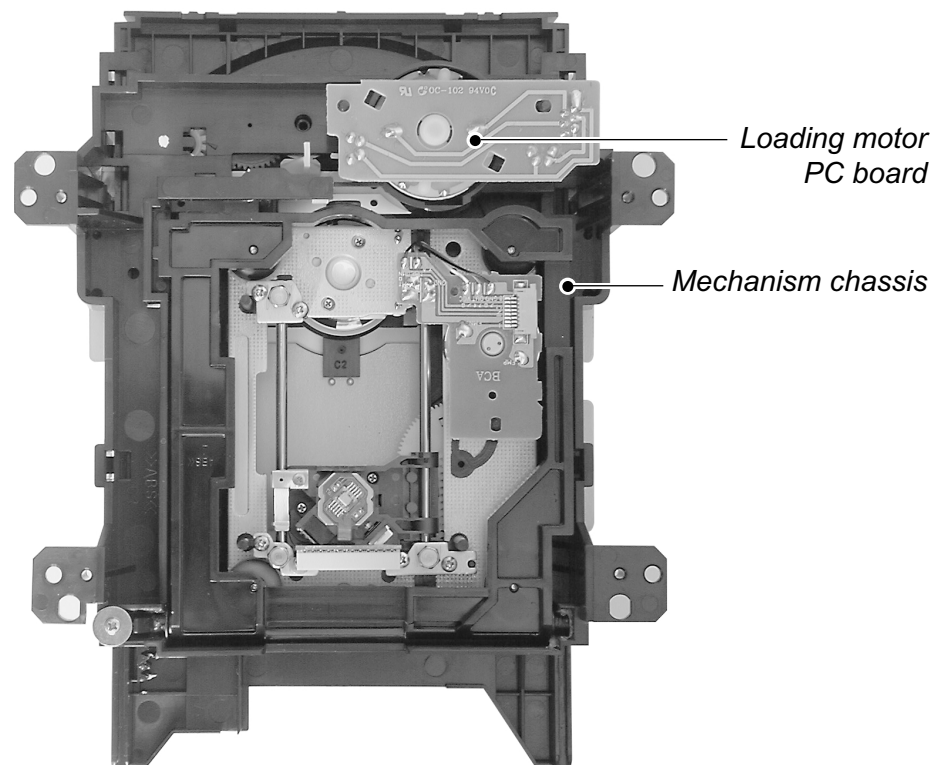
Pickup mechanism chassis assembly (Bottom side)
